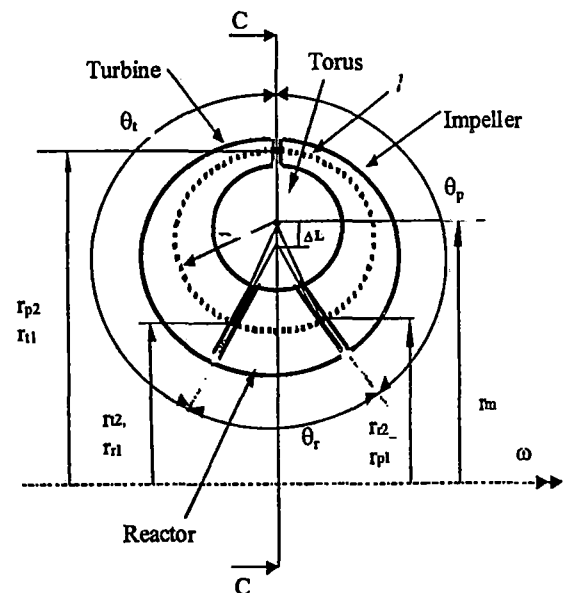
Schematic description of a three element torque converter (P-impeller, T-turbine, R-reactor) (1-inlet, 2-outlet)
